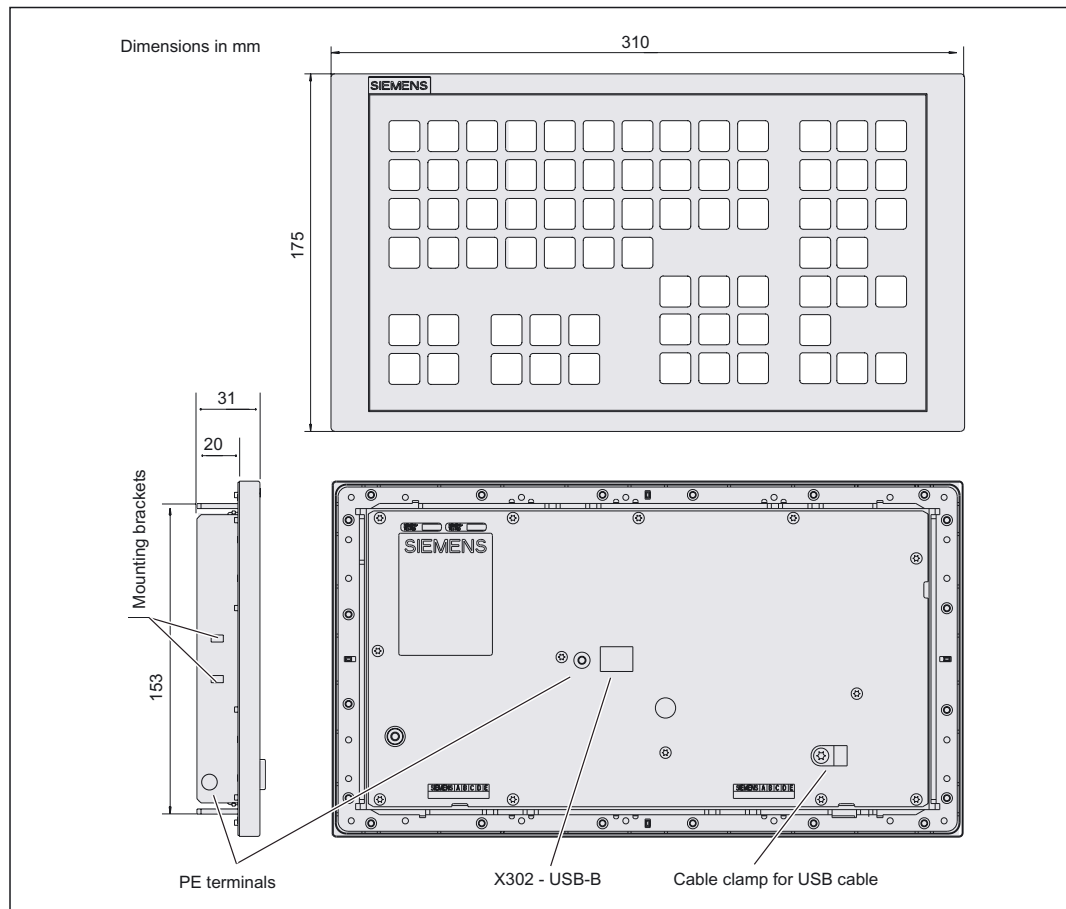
Front, side and rear views of CNC full keyboard KB 310C
